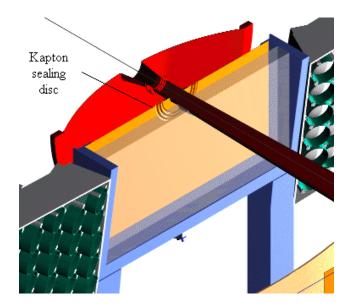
The front kapton sealing disc, sealing between frame and beampipe
